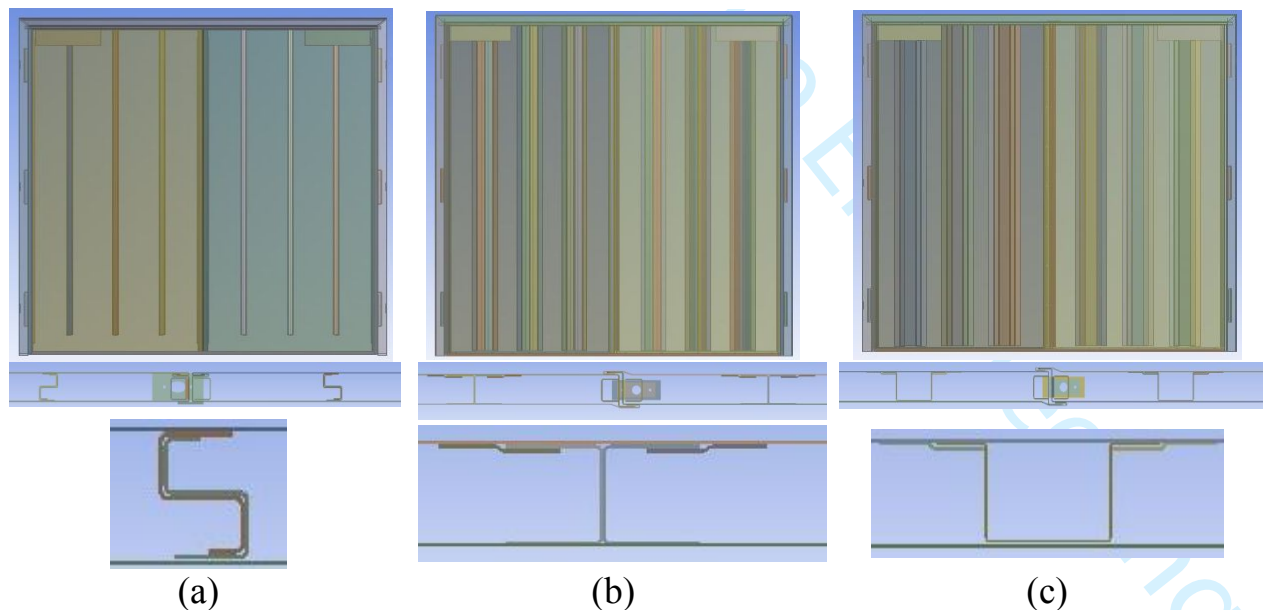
Door layout with longitudinal stiffener; (a) double S, (b) double CC back to back and (c) hat omega Ω cross sections
